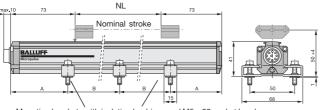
Dimensional drawing (BTL5...P-S 32 transducer with floating magnet BTL5-P-3800-2)
